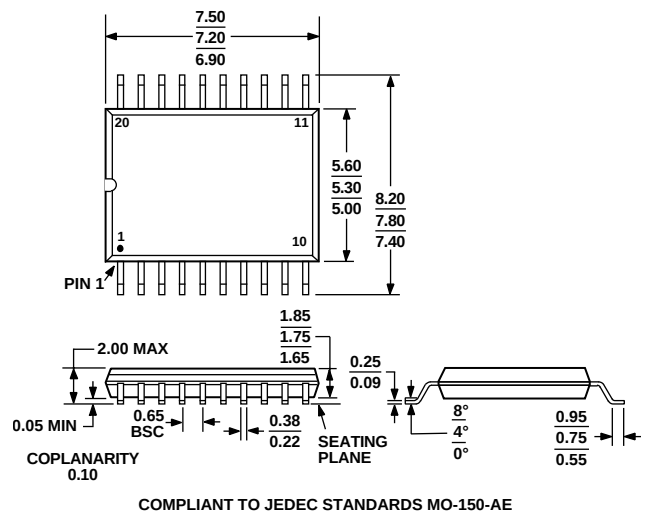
20-Lead Shrink Small Outline Package [SSOP]
